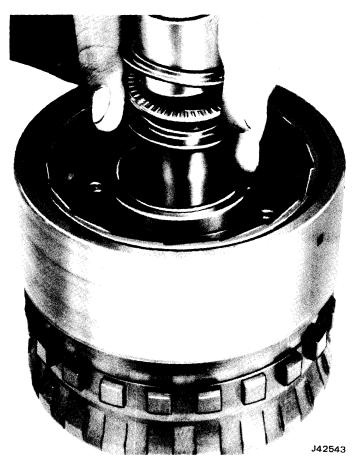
Installing Center Support-to-Sun Gear Thrust Bearing and Races
